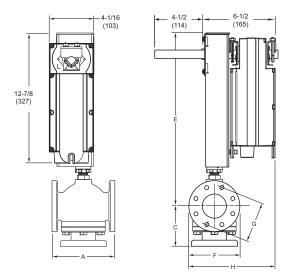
Mx40-717x with Flanged 3-Way Globe Valves
